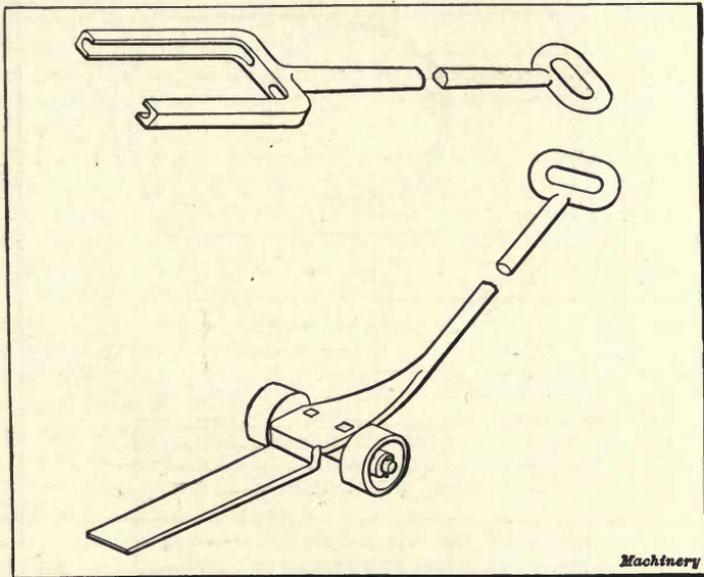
Grapple Iron or Fork used for Handling Casehardening Boxes and Truck for Handling Heavy Boxes
